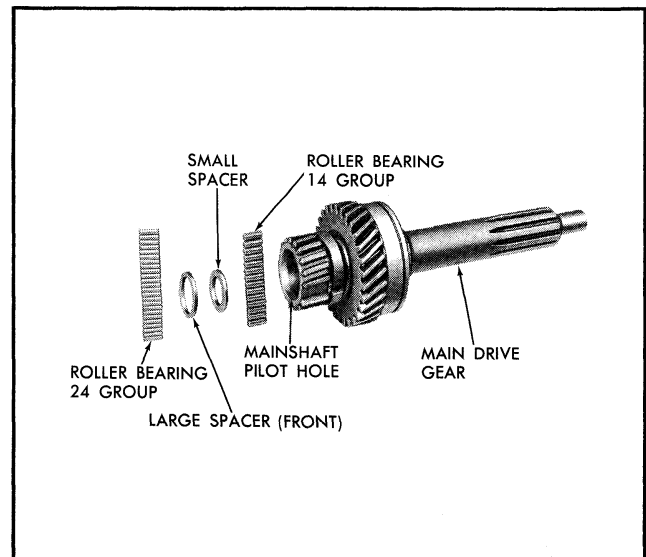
Main Drive (Clutch) Gear Assembly
